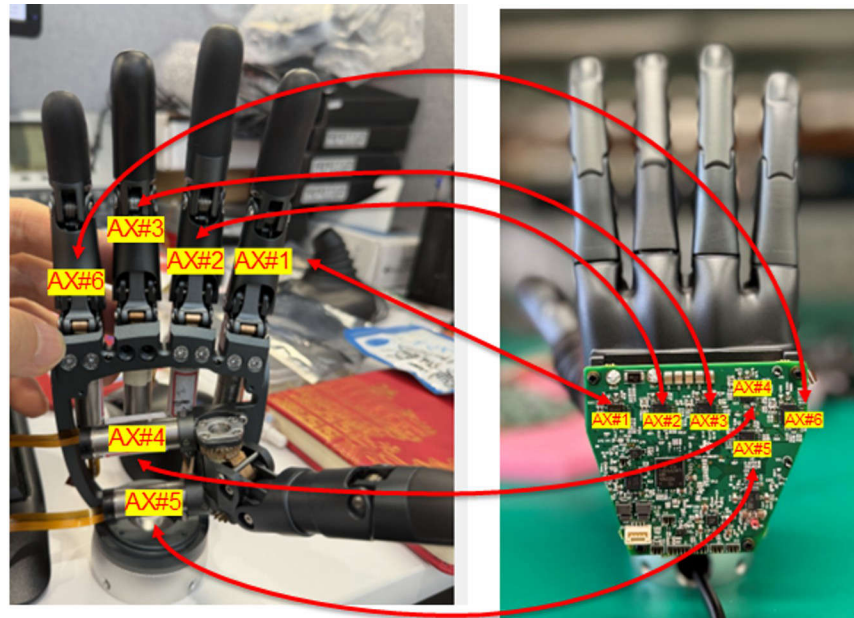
TIDA-010992 Motor Cable Assembly for Hand
